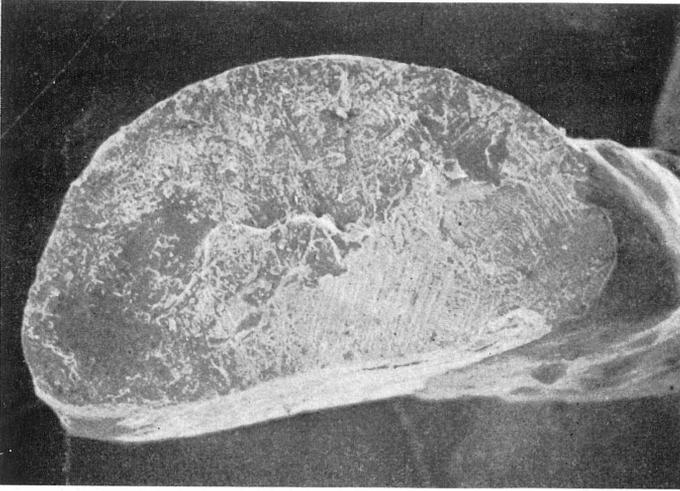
SEM micrograph of a retentive clasp assembly arm fracture surface.
